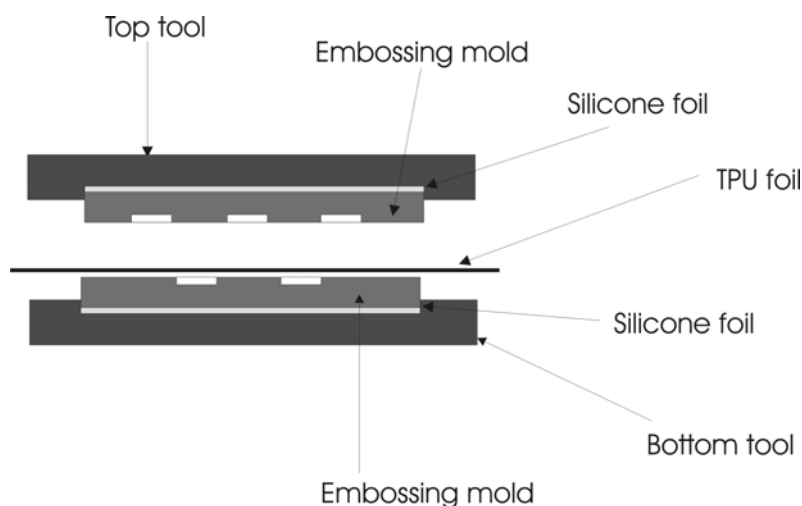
Scheme of the assembly for double side embossing of TPU elastomers.
